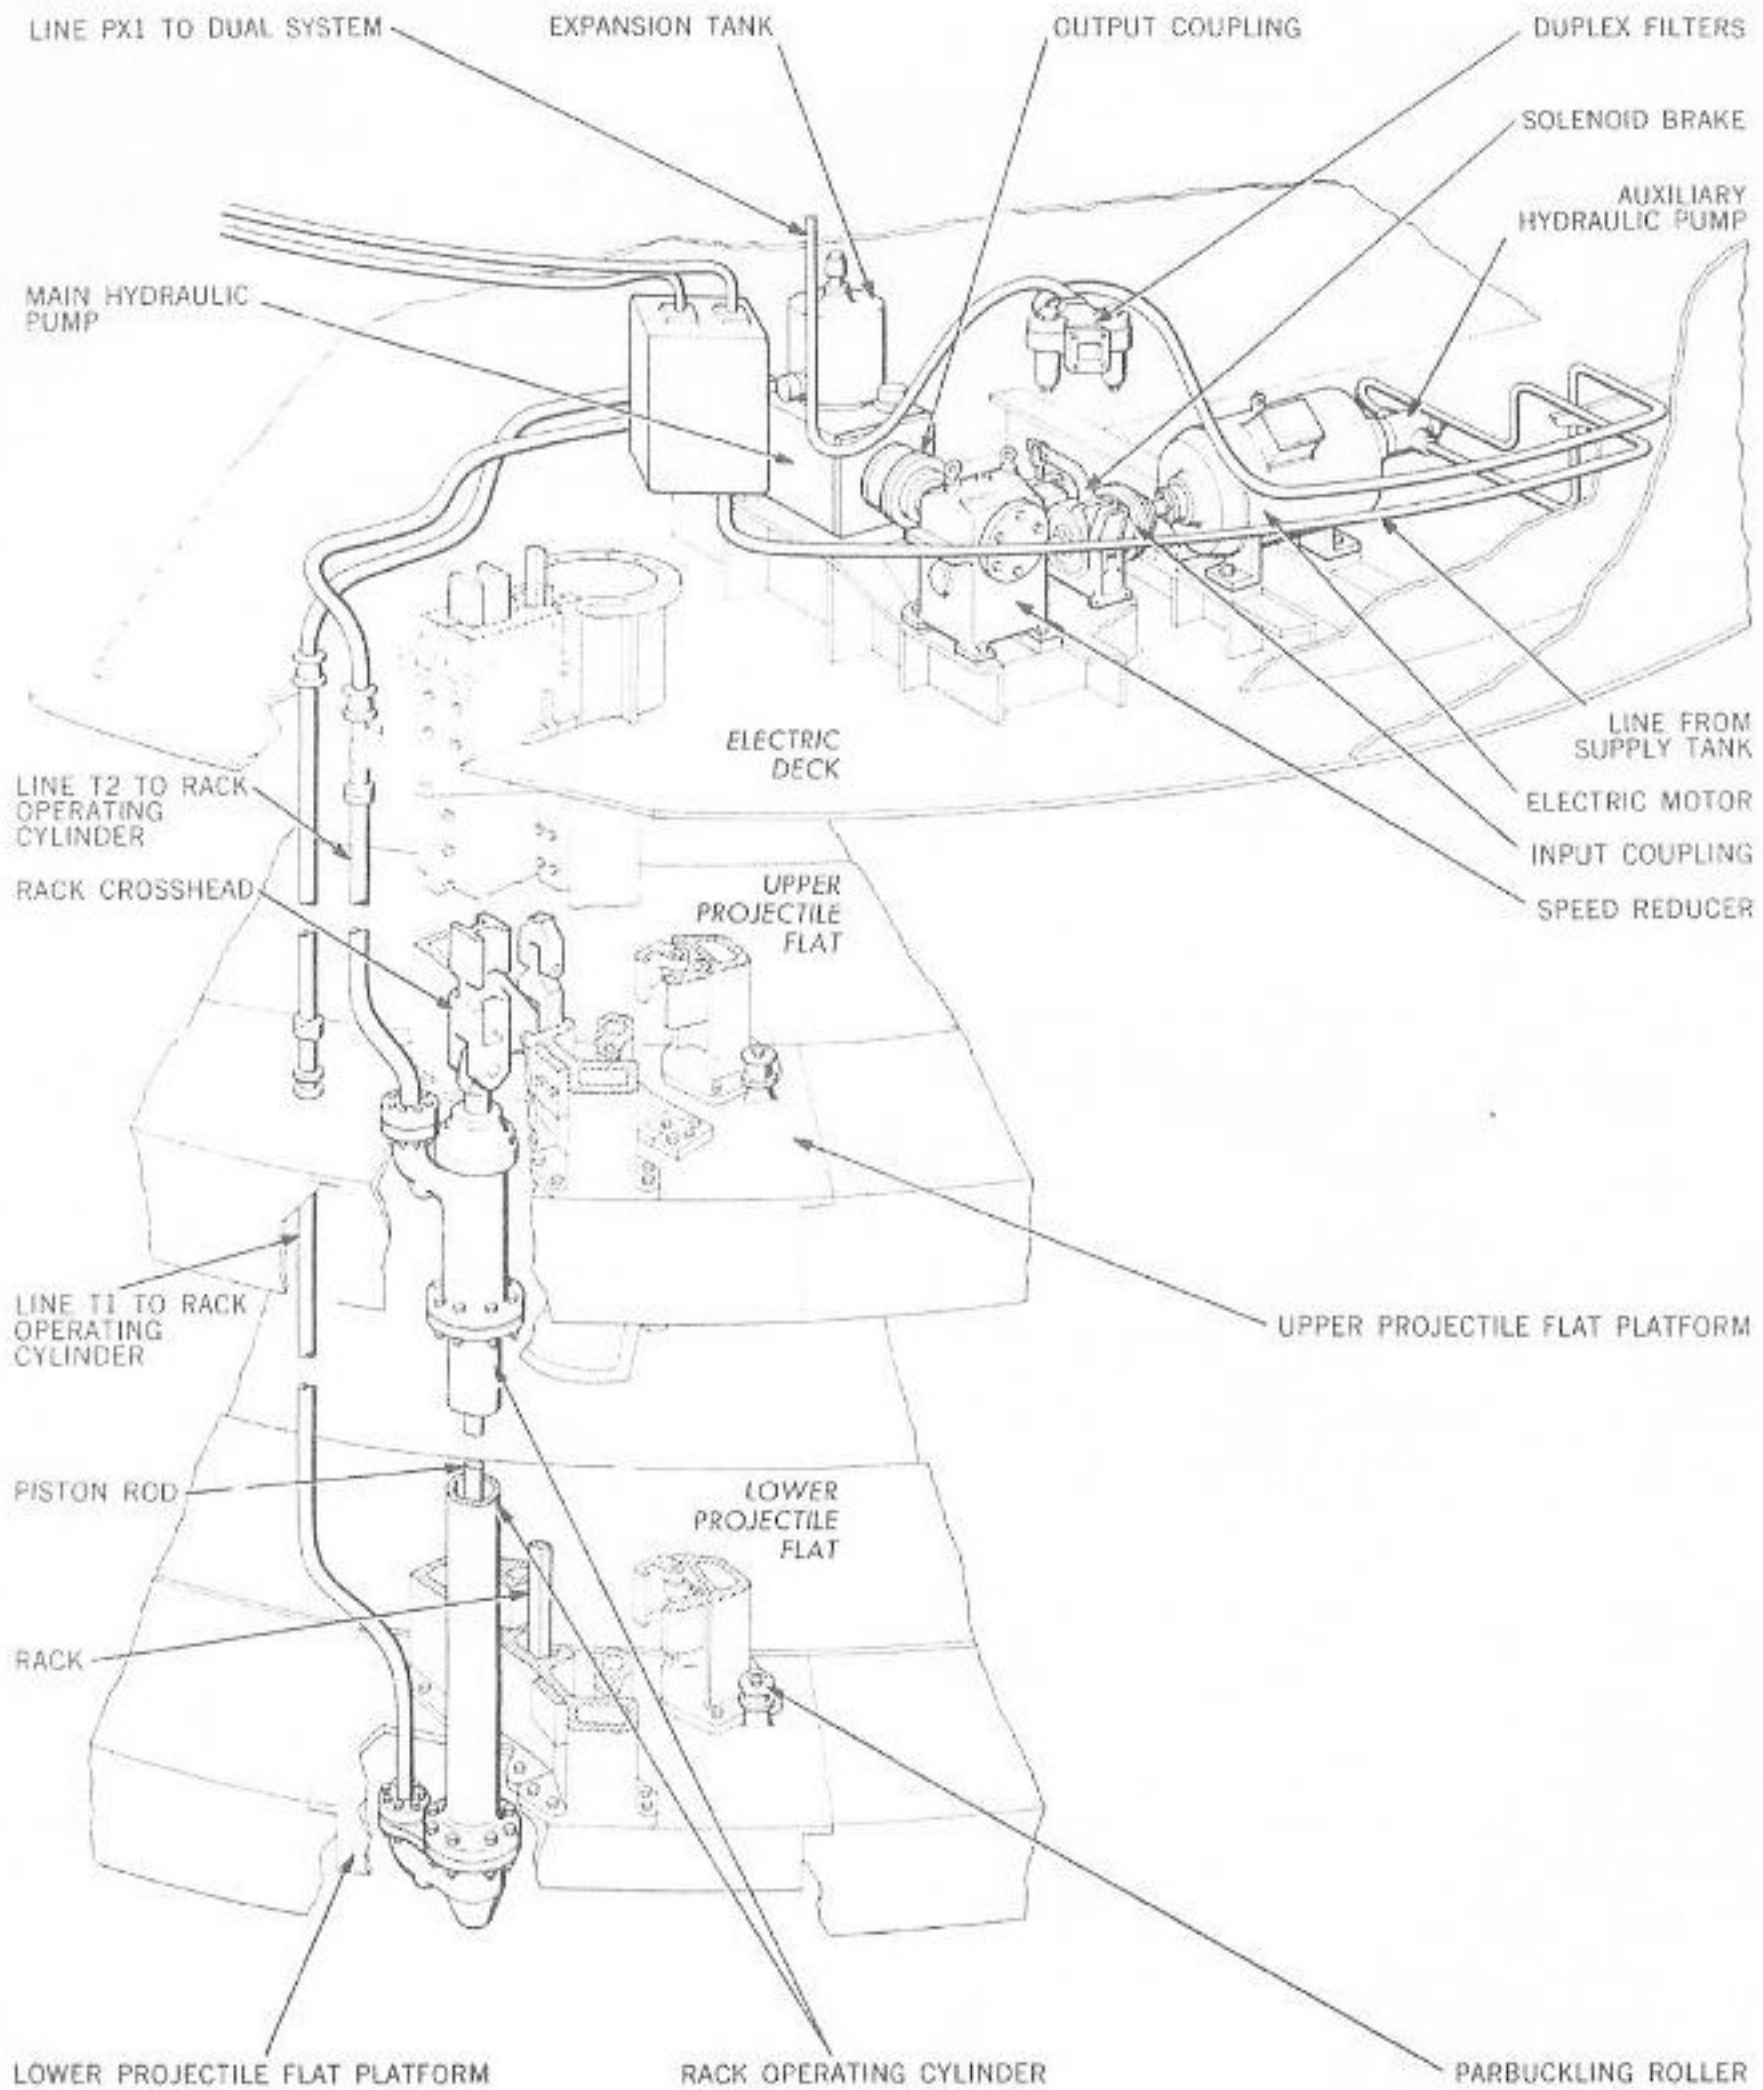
Projectile Hoist Power Drive Assembly - General Arrangement
